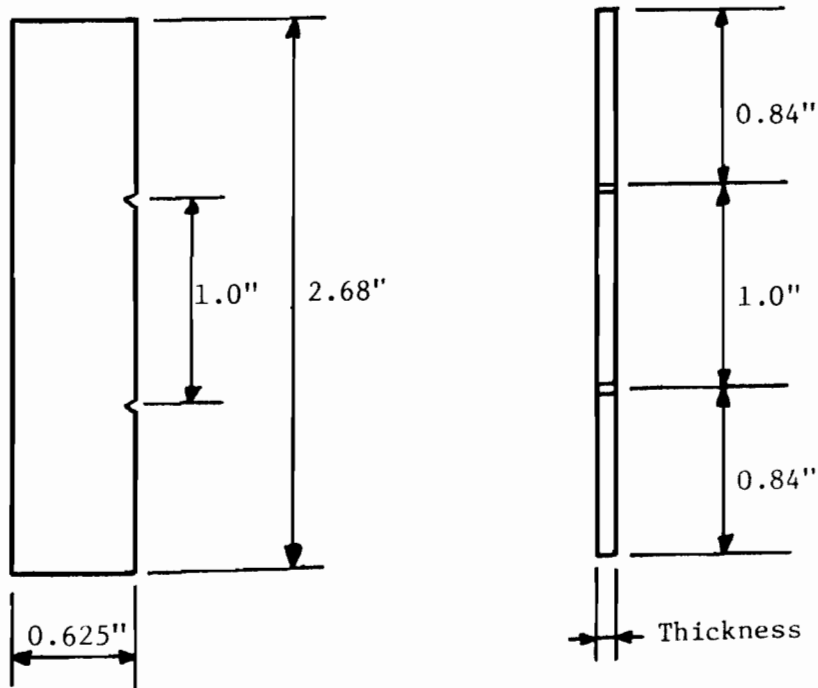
Nominal Dimensions of Compression Coupons Used for All Sheet Steels
